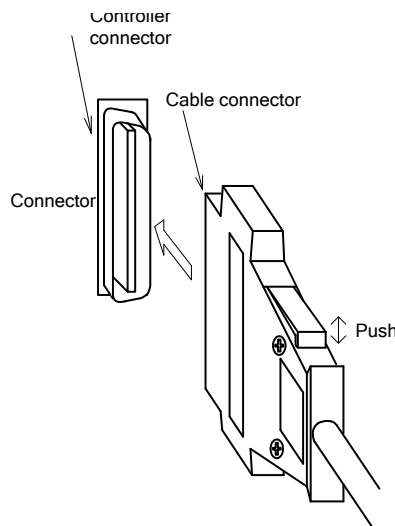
Attaching and detaching incremental encoder input signal cable
